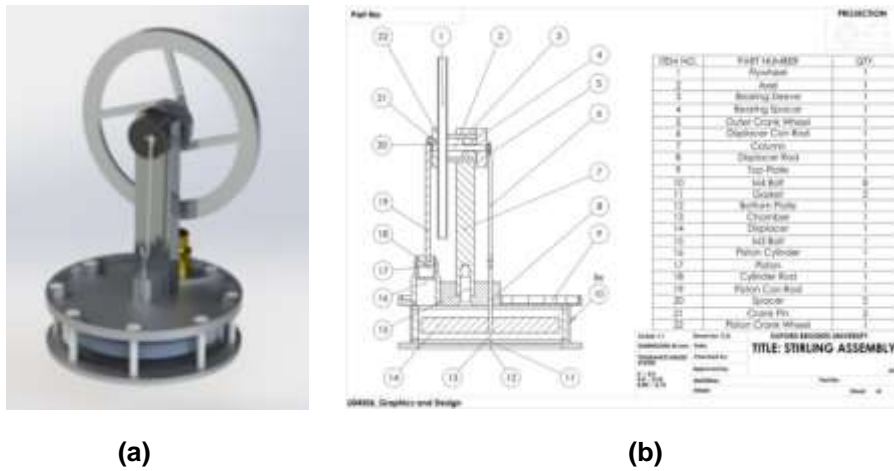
Stirling Engine: (a) rendered image; and (b) sectioned assembly with list of parts.
